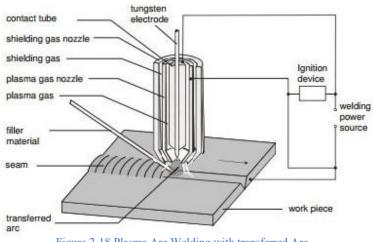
Plasma Arc Welding with transferred Arc
